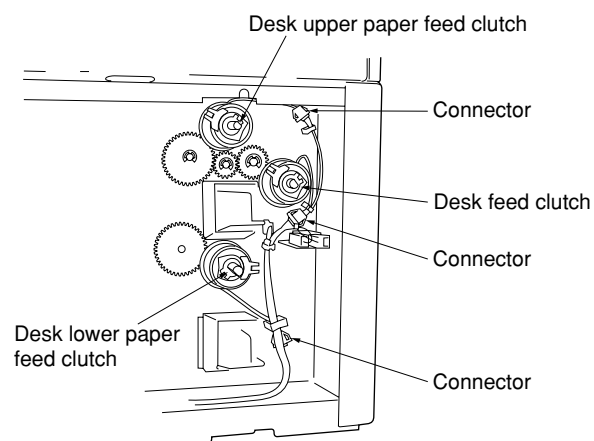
Detaching the desk feed, upper and lower paper feed clutches
